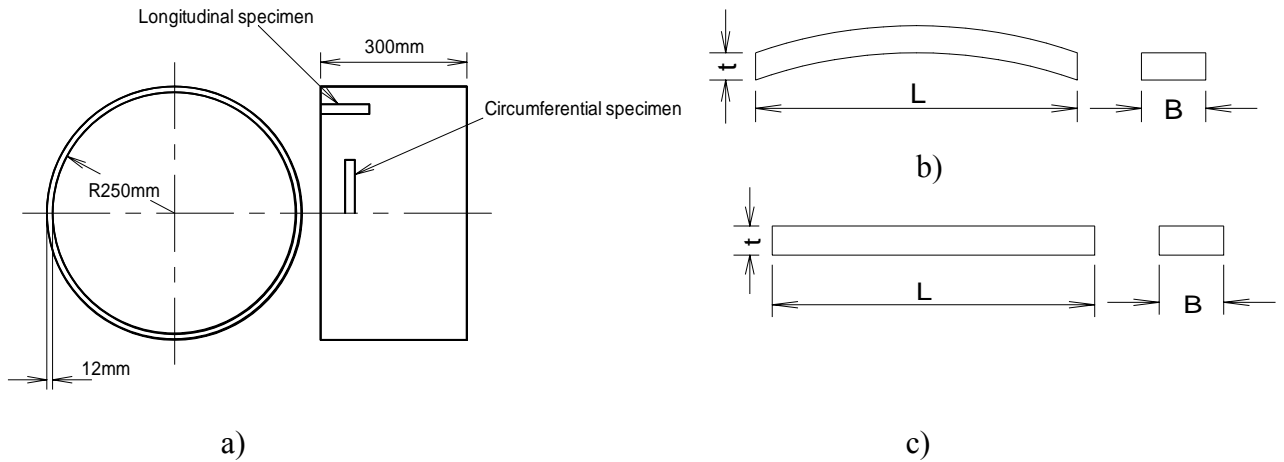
a) Pipe and cut specimen; b) Circumferential specimen; c) Longitudinal specimen.
